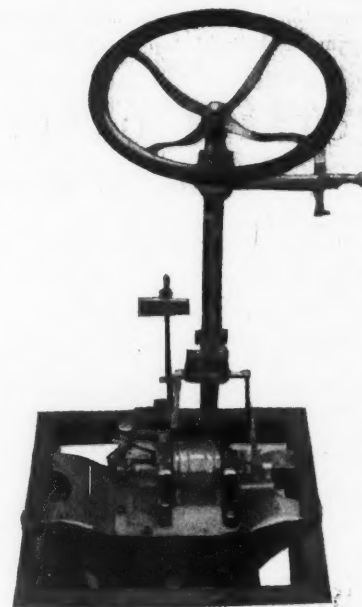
The Lewis gearshifting device mounted on top of the gearcase. The illustration also shows the control under the steering wheel
